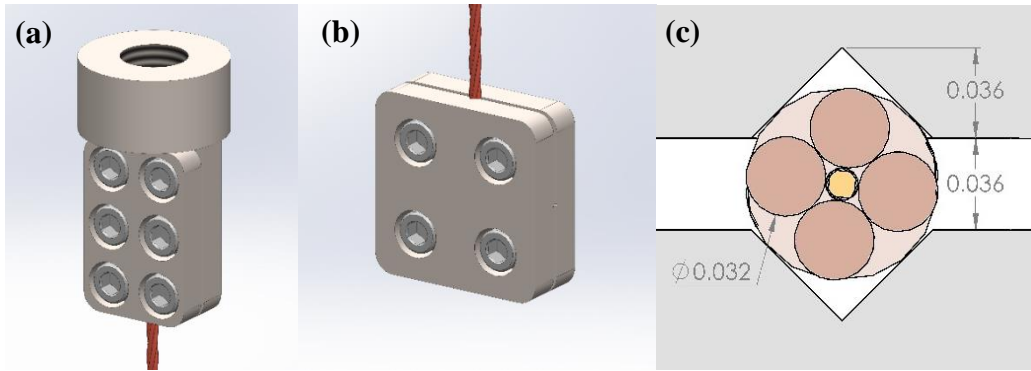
Design of the sample grips for the cable measurements: (a) top sample grip, (b) bottom sample grip, and (c) cross-section of the cable and v-groove. Units are in inches.
